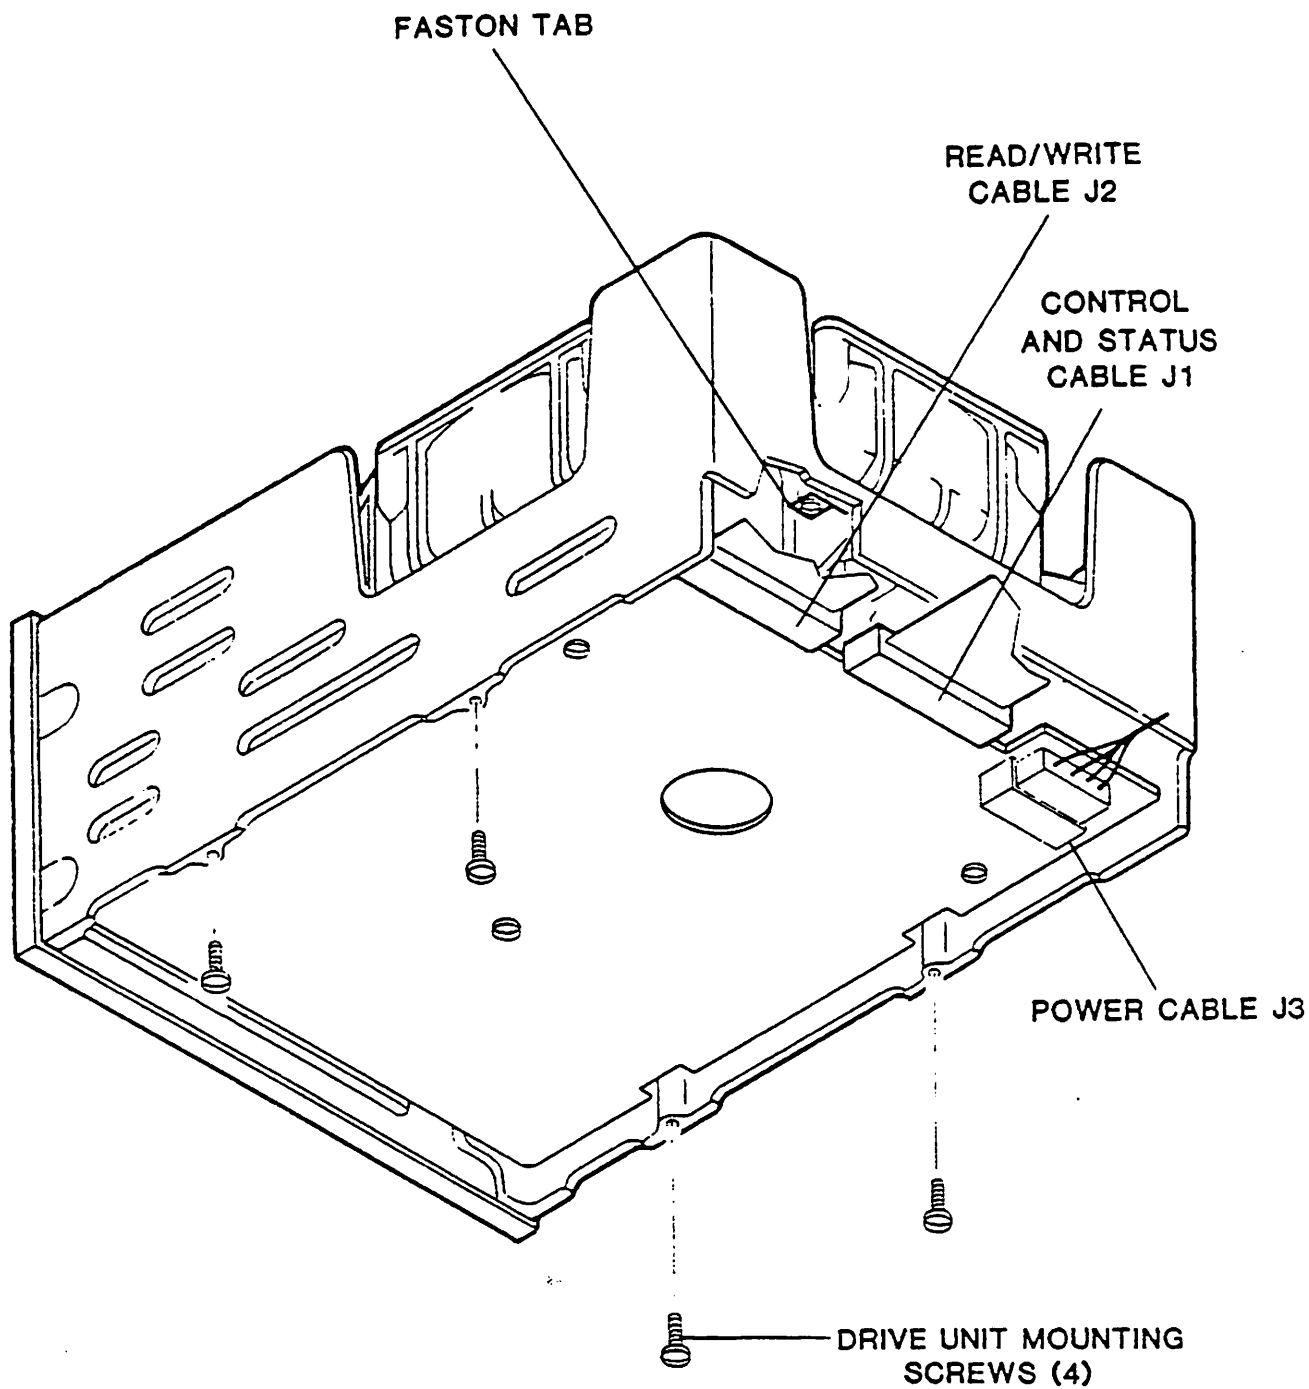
Drive Unit and Cabling Removal and Replacement
